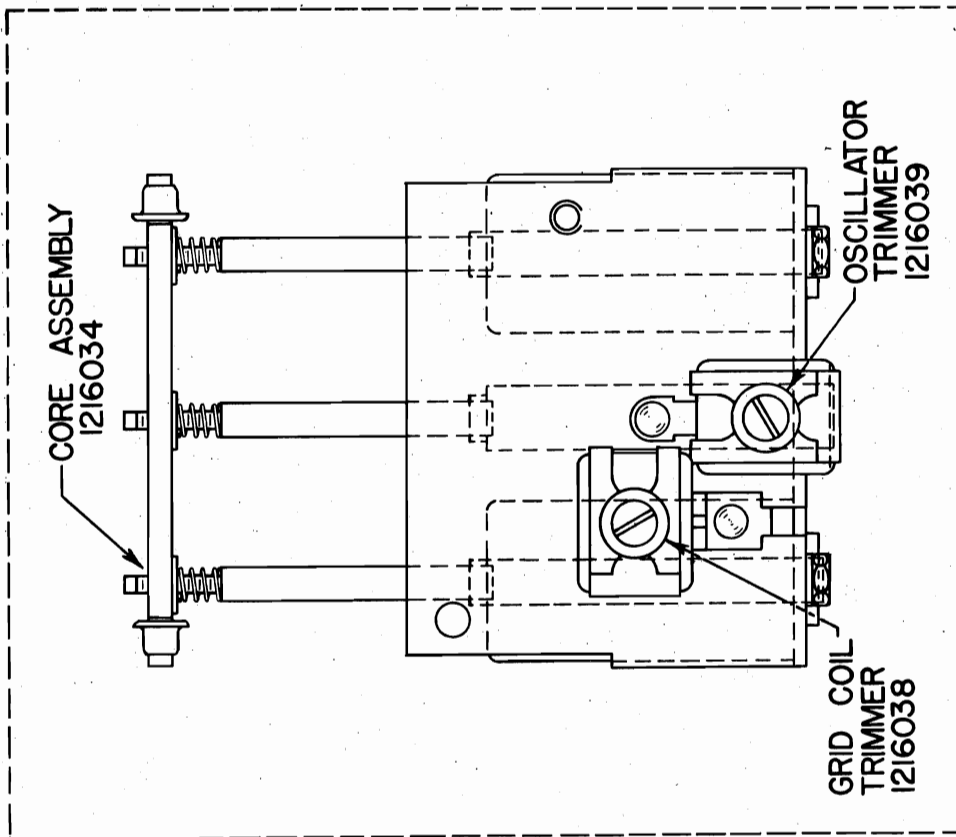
PERMEABILITY COIL ASSEMBLY PARTS—RADIO 985792
